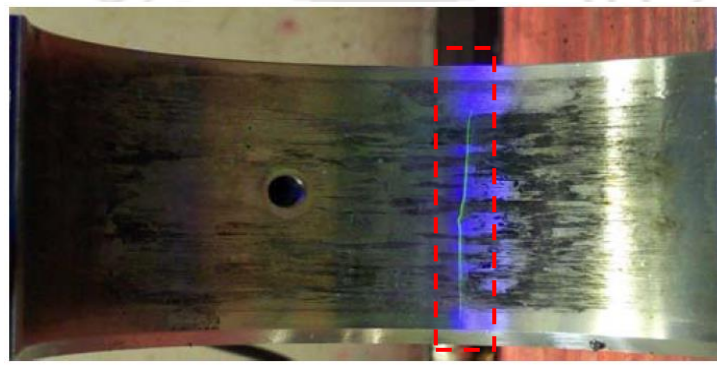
Connecting rod fracture due to fretting (Reprinted with permission from [25])
